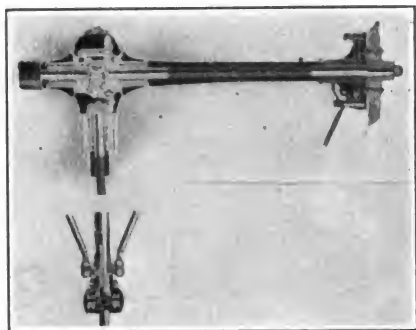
SEMI-SECTIONAL VIEW OF REAR AXLE
